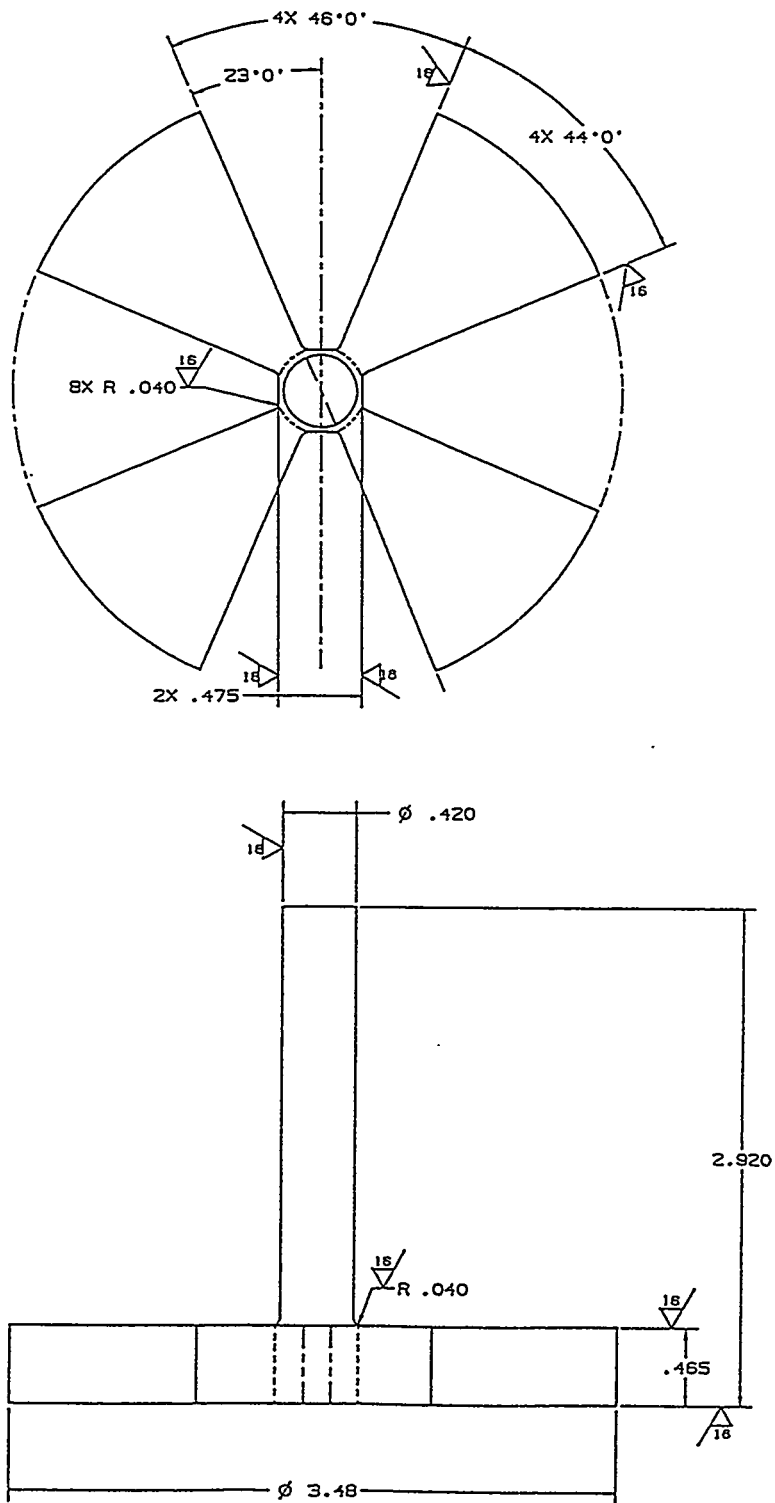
Spin Test Specimen Design (Dimensions in Inches)
